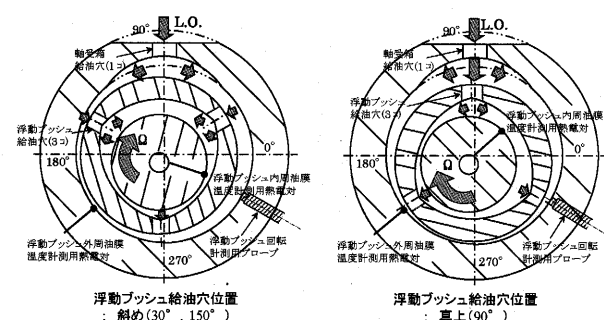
L.O. Supply Holes Location of Floating Bush Bearing
